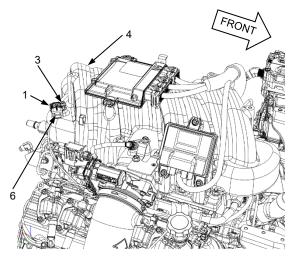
Manifold Absolute Pressure (MAP) Sensor (1), MAP Sensor Electrical Connector (6), MAP Sensor Mounting Bolt (3), Upper Intake Manifold (4)
